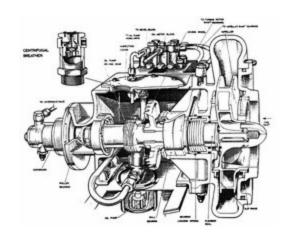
Mk XVI package Pulsometer 30,000 fuel pump
